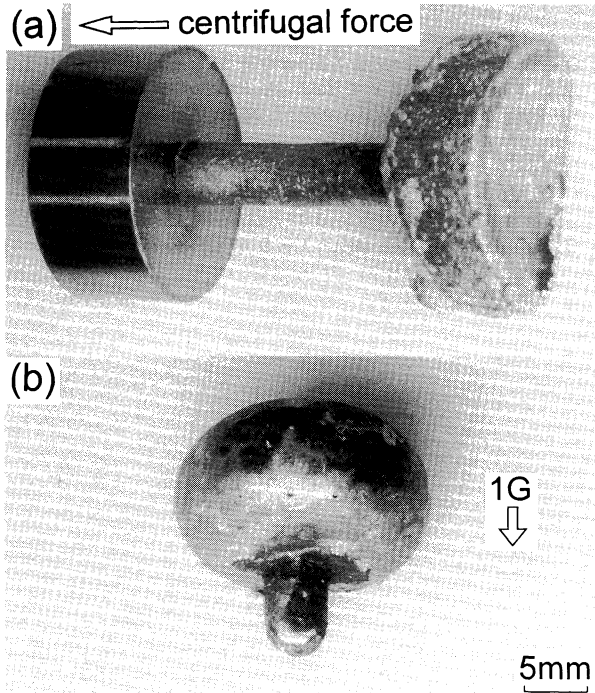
Specimens produced by using a mold with a slender cavity (diameter: 5 mm). (a) Specimen produced by the CCS process. (b) Specimen produced under 1 G (Ni–Al alloy that did not flow into the mold cavity).
